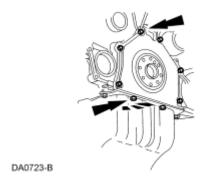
Identifying Crankshaft Rear Seal Retainer Plate Bolts Courtesy of FORD MOTOR CO.
